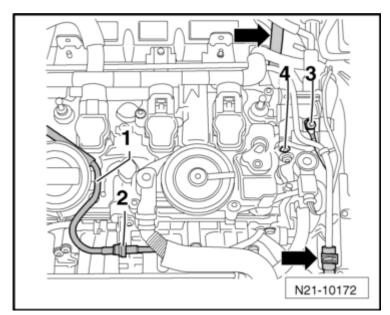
Identifying Vacuum Line -1-, Ground Wire -3- And Bolt -4-
